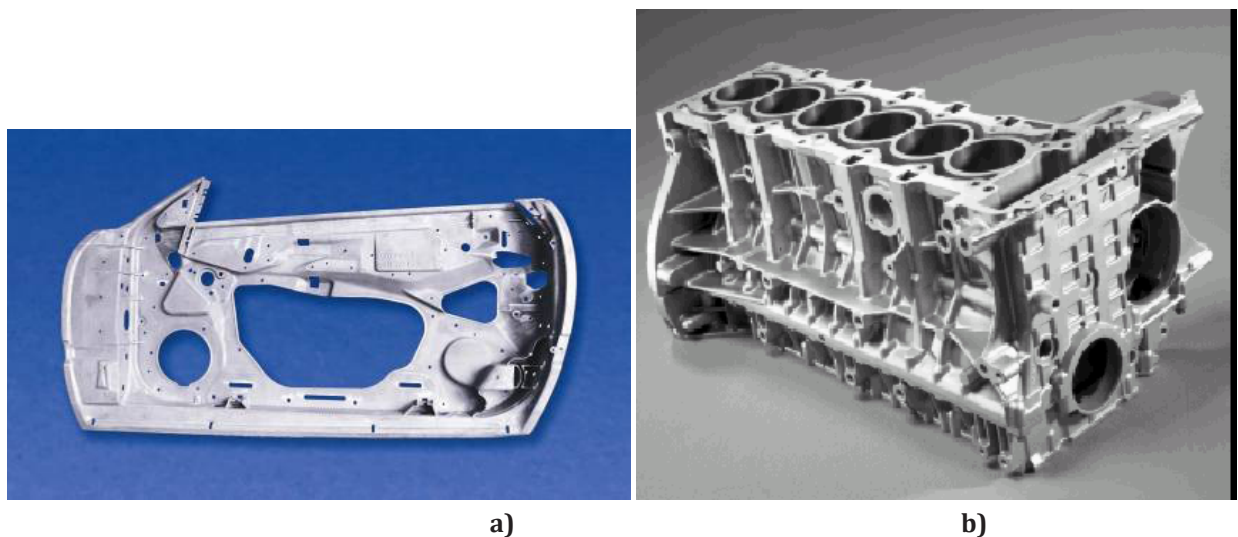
The HPDC parts made of Mg-based alloy; (a) inner door frame, and (b) engine block.
